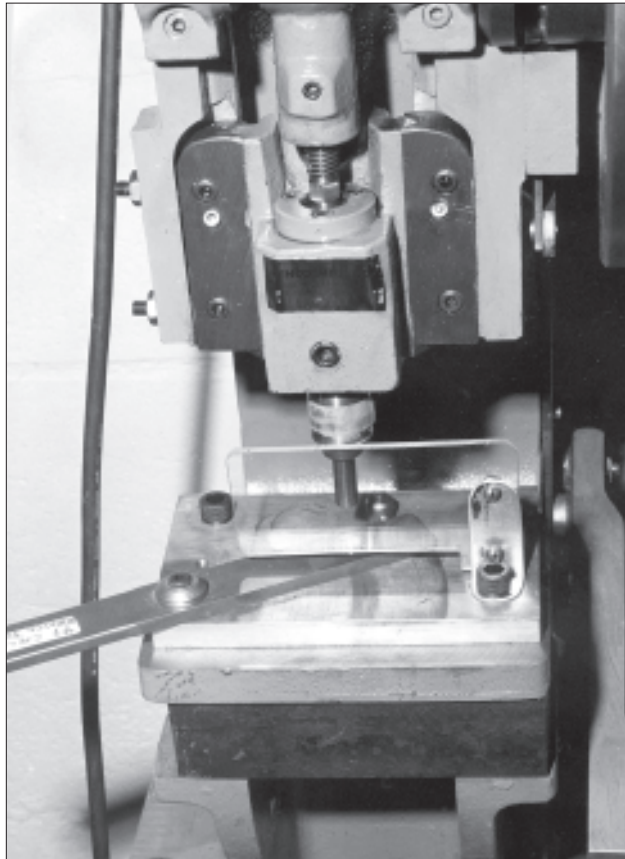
Gyrojet primer-crimping fixture. MBA photo.
